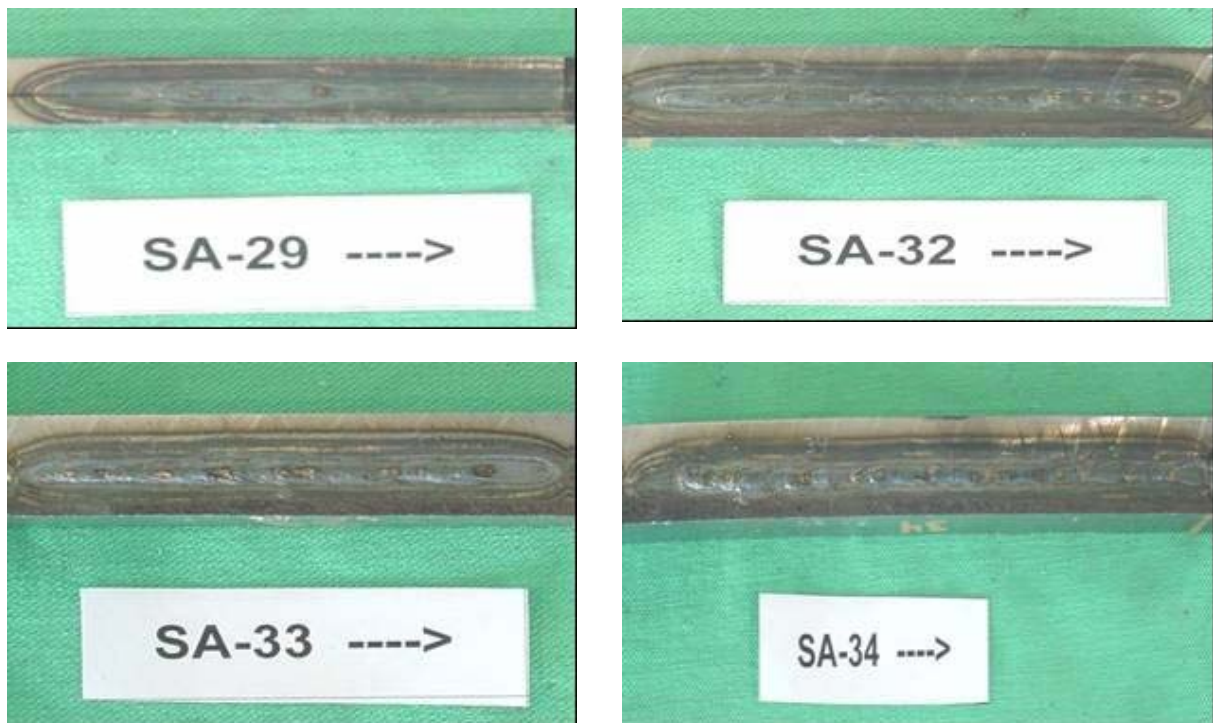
View of Typical Penetration Bead Profiles in Welds SA-29, SA-32, SA-33, and SA-34
